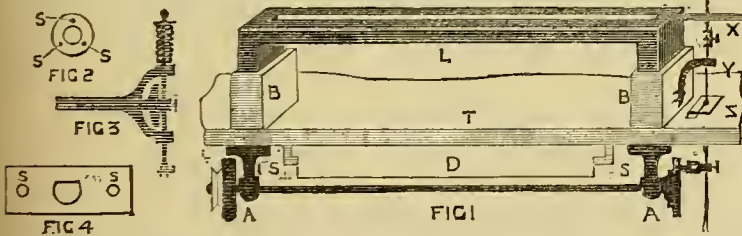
LATHE AND FITTINGS.—A, A, Supports for Shaft attached by Screws, S, to under surface of Top of Bench, T; D, Drawer under Bench; L, Lathe Bed supported on Blocks, B; X, Table; Y, Support; Z, Brass Plate. FIG. 2.—PLAN OF SUPPORTING A IN FIG. 1.—S, Screws. FIG. 3.—SPRING AT TOP OF MACHINE. FIG. 4.—BRASS PLATE SHOWING SHAPE OF HOLE FOR SAW JAW THAT IT MAY NOT BE ABLE TO TURN ROUND.—S, Screws.
